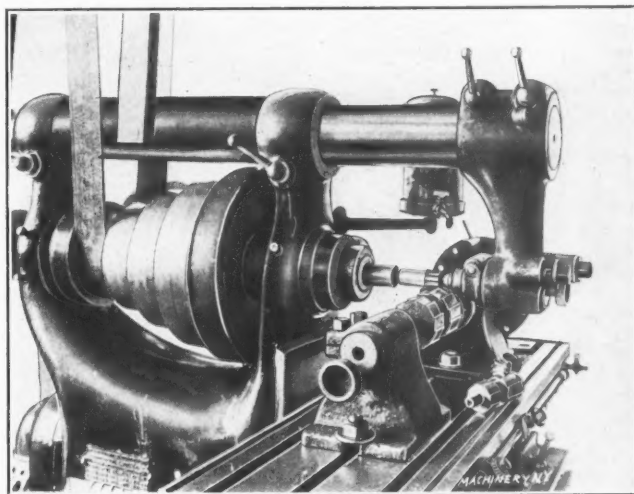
Milling the Cam Surface on the Cam Bolt.
